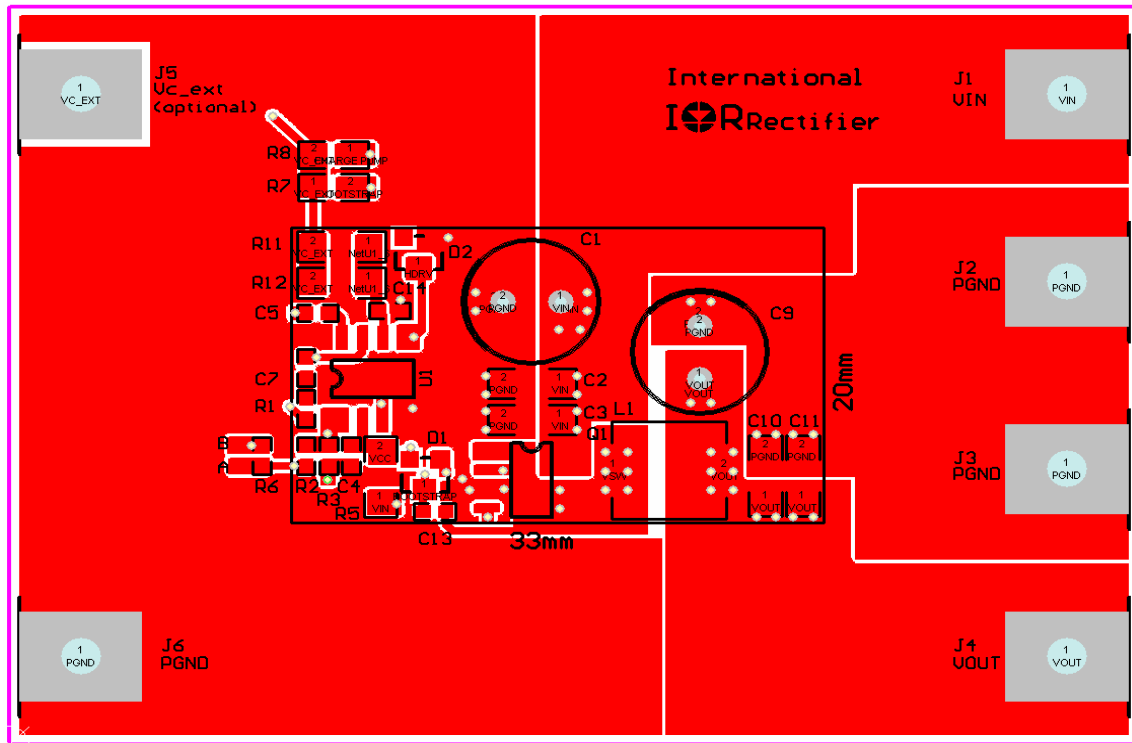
IRPP3637-06A Reference Design top layer placement and layout.
